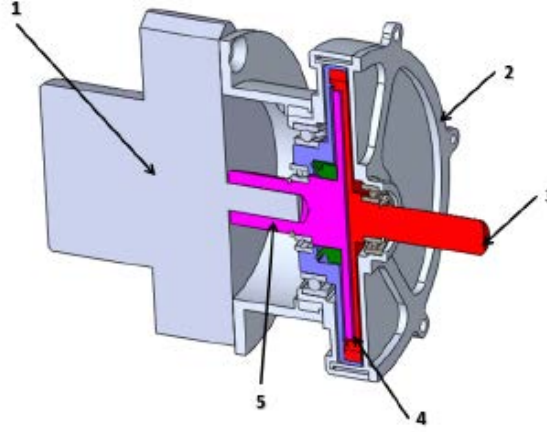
Crossection of the proposed actuator. 1. Motor and planetary gear 2. Clutch housing 3. The output shaft 4. Free space for magnetorheological fluid 5. Input shaft.
